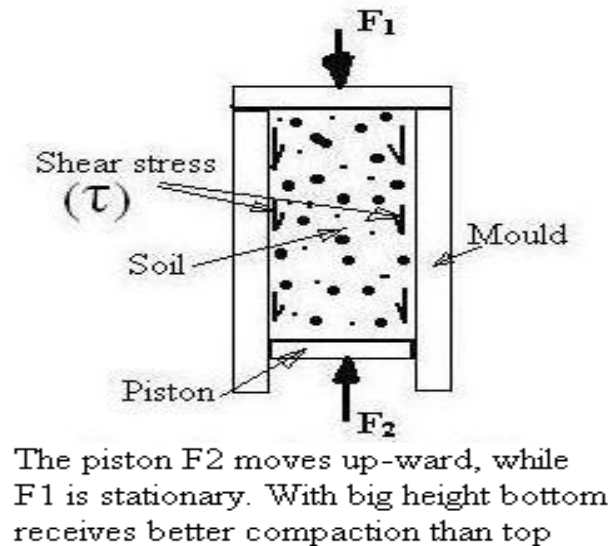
Schematic Diagram of an SSB Compressing Machine.
